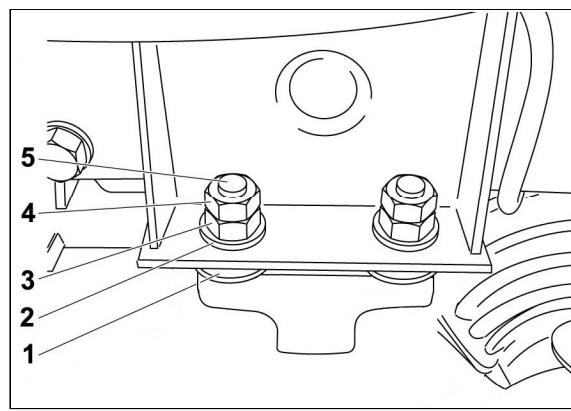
Attachment of frame to the cross girder behind the axle final drive housing
